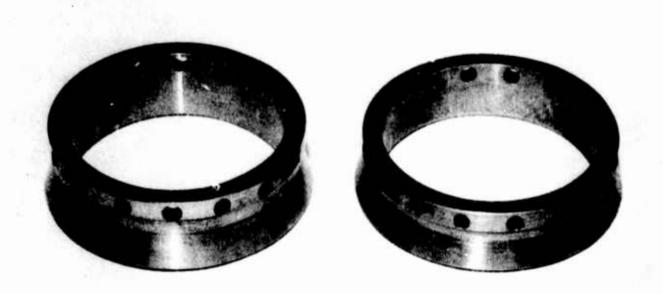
Configuration of Bearing Oil Slingers. Final Configurations is Shown in Figure 50.
